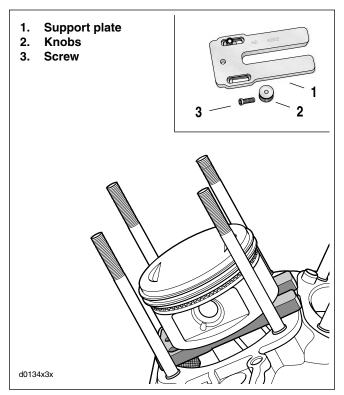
Piston Support Plate (Part No. HD-42322)
